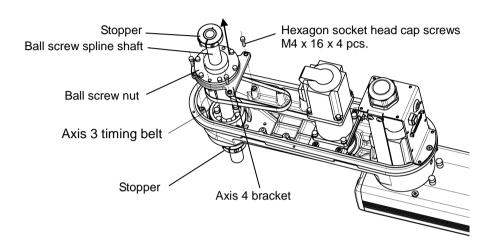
Replacing axis 3 timing belt (KHL-500, KHL-600, KHL-700)
